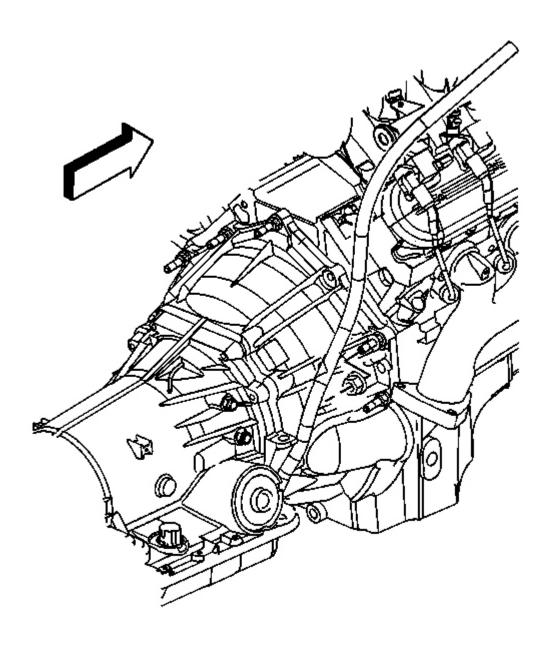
View Of Oil Level Indicator Tube Nut Courtesy of GENERAL MOTORS CORP.
